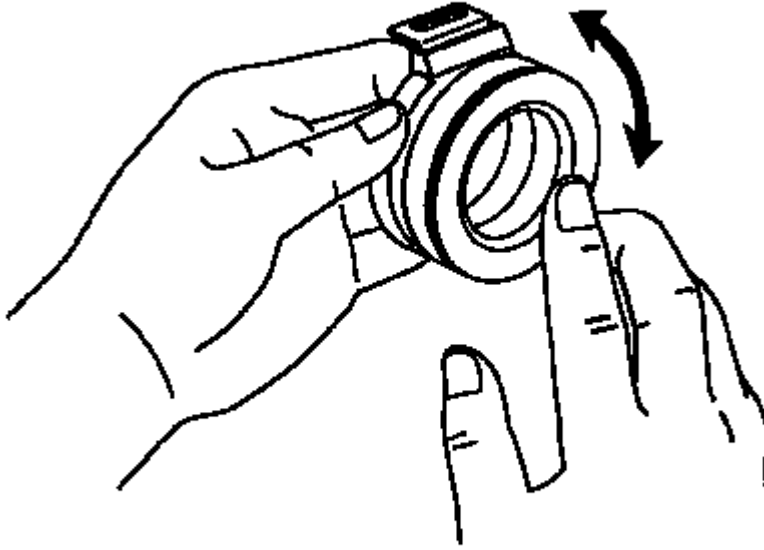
Clutch Release Bearing and Door Shaft Inspection
